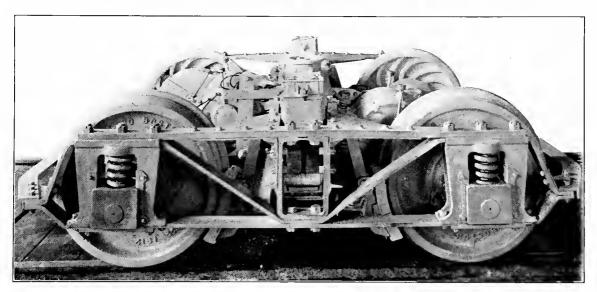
Four-Wheel Motor Truck with Wheels Rotating on Axles, for Chesapeake & Ohio Car Shown in Fig. 195. Federal Storage Battery Car Company.
